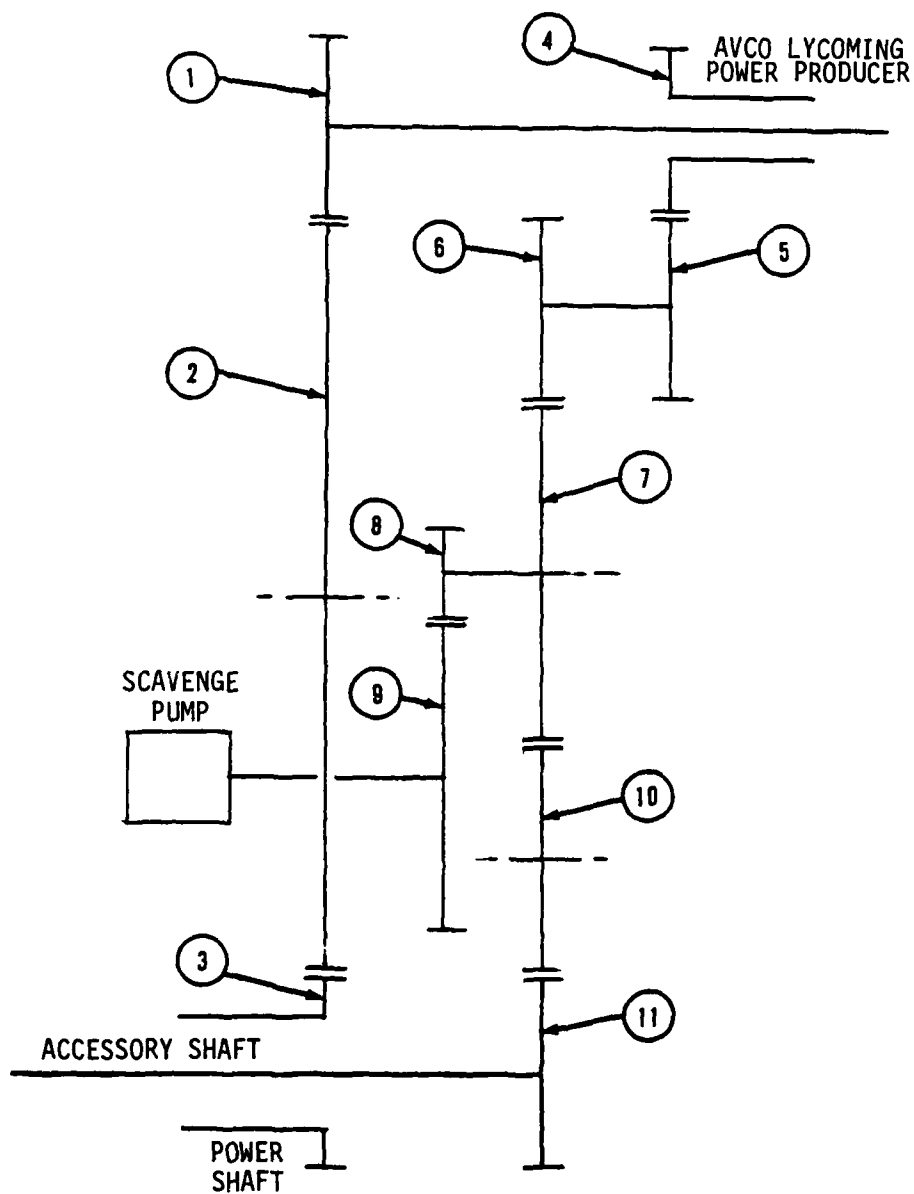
Adapter Gearbox Gear Schematic - Power and Accessory Train.
